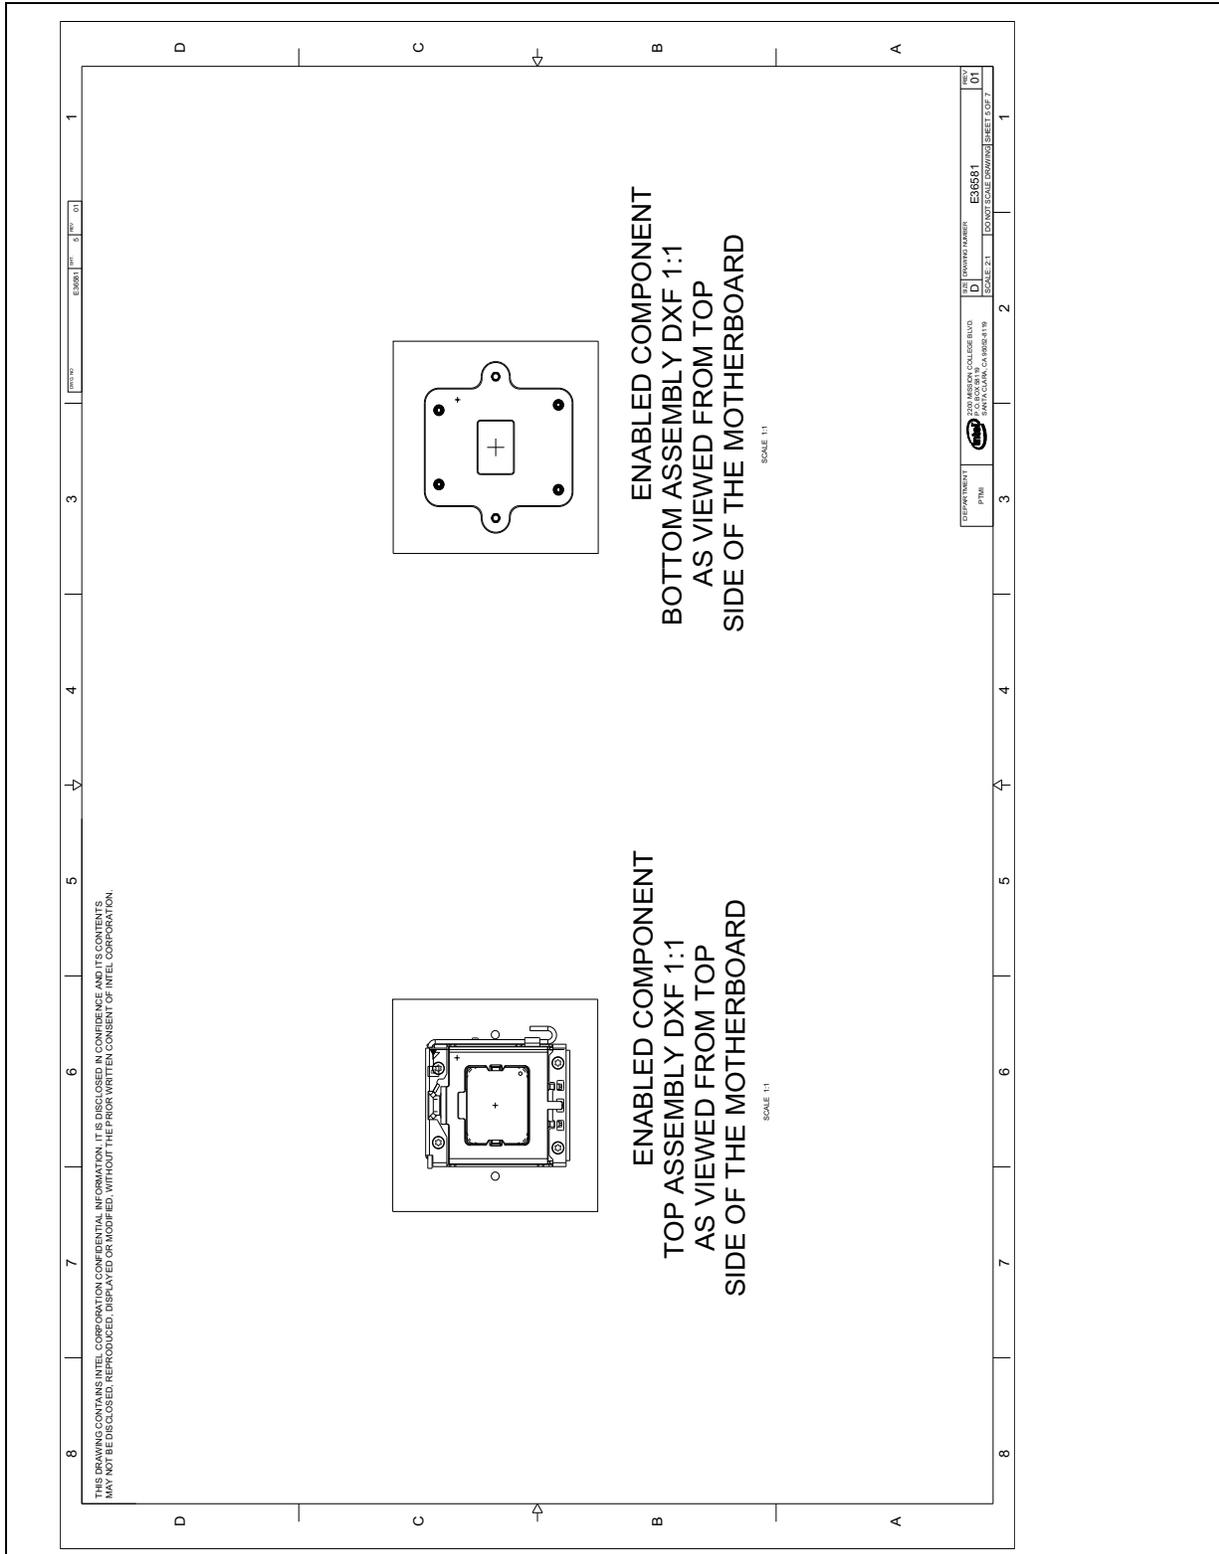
Enabled Component Board Keepout Mechanical Drawing – Sheet 6 of 7
